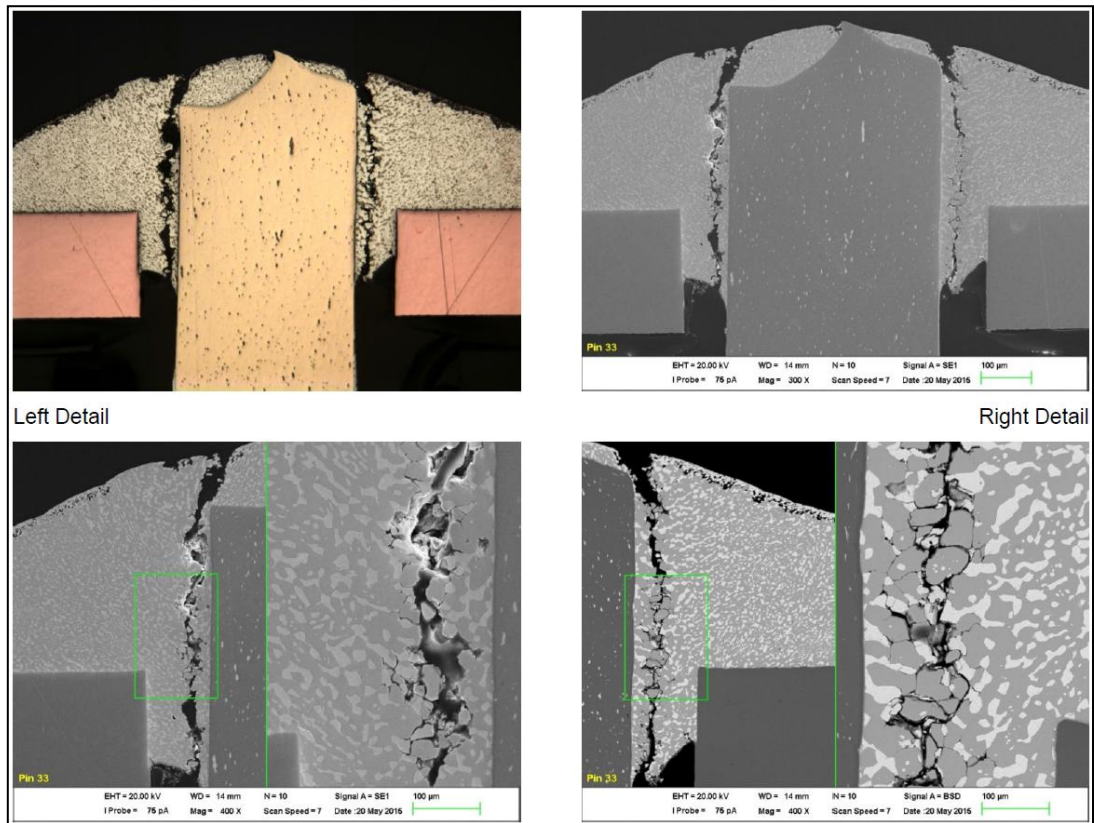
Cross sectioned pin to flex solder joints of Pins 33
